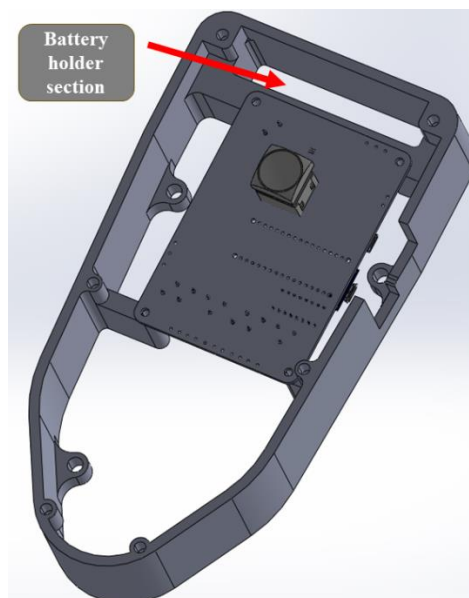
Assembling the Upper-Arm Cover: Placement of the PCB and Battery within the sidewall segment, following the connection of sensors and servo to the PCB.
